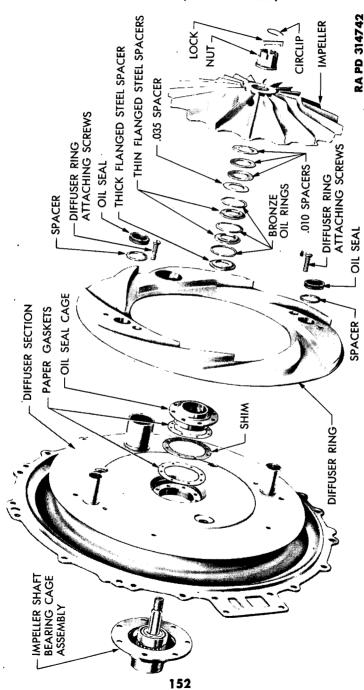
Impeller, Diffuser Ring, and Oil Cage — Disassembled
